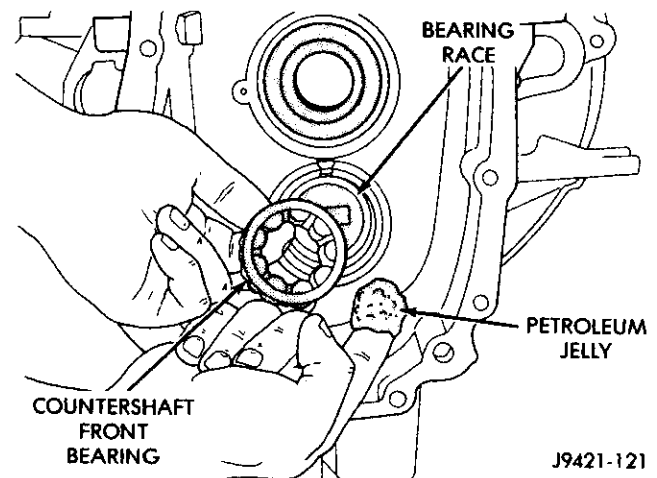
Lubricating/Positioning Countershaft Front Bearing
